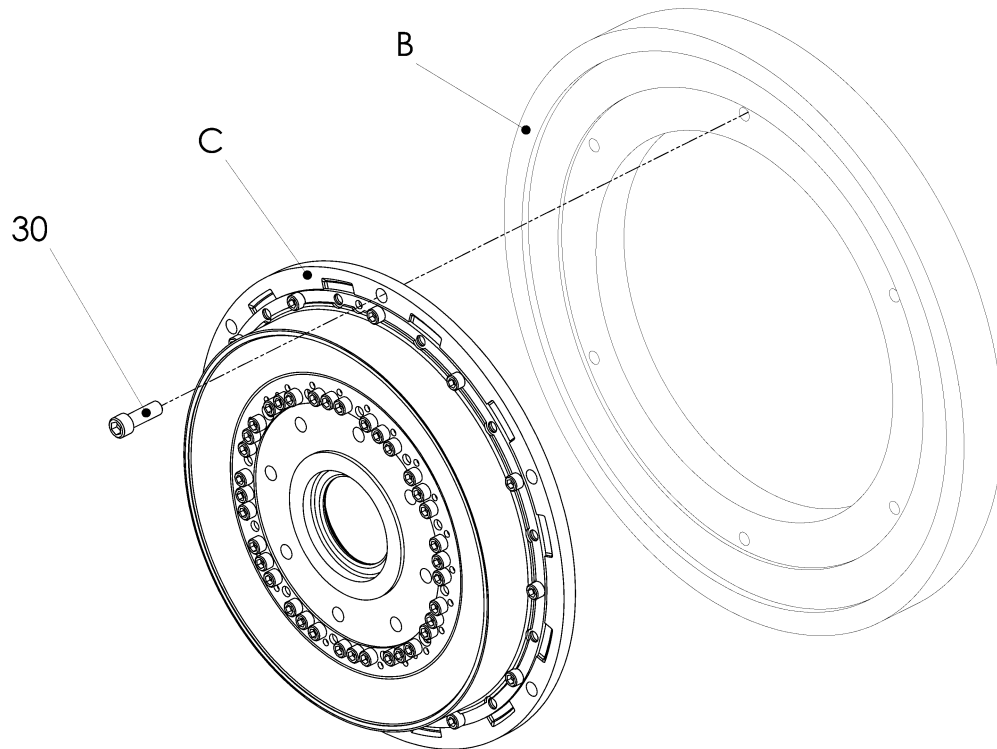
Mounting the coupling types -FA.. and -FB.. to the flywheel
